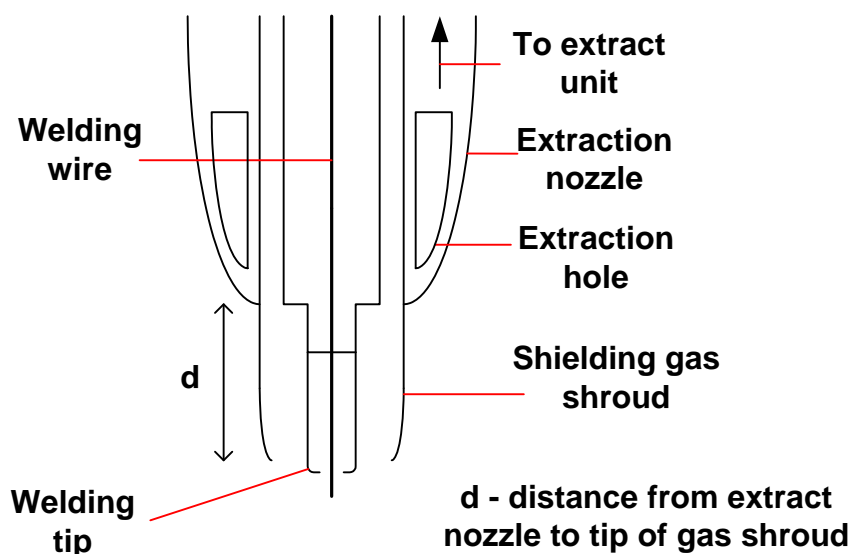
Schematic cross-section diagram of fume extracting welding torch
